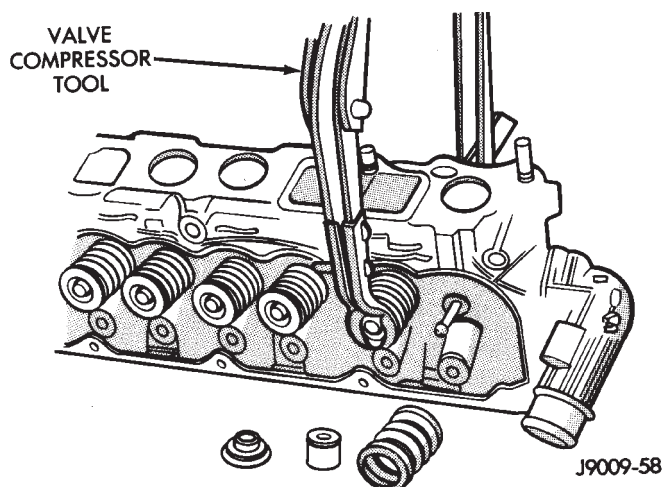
Valve Compressor Tool C-3422-B (J-8062 or 8014)
